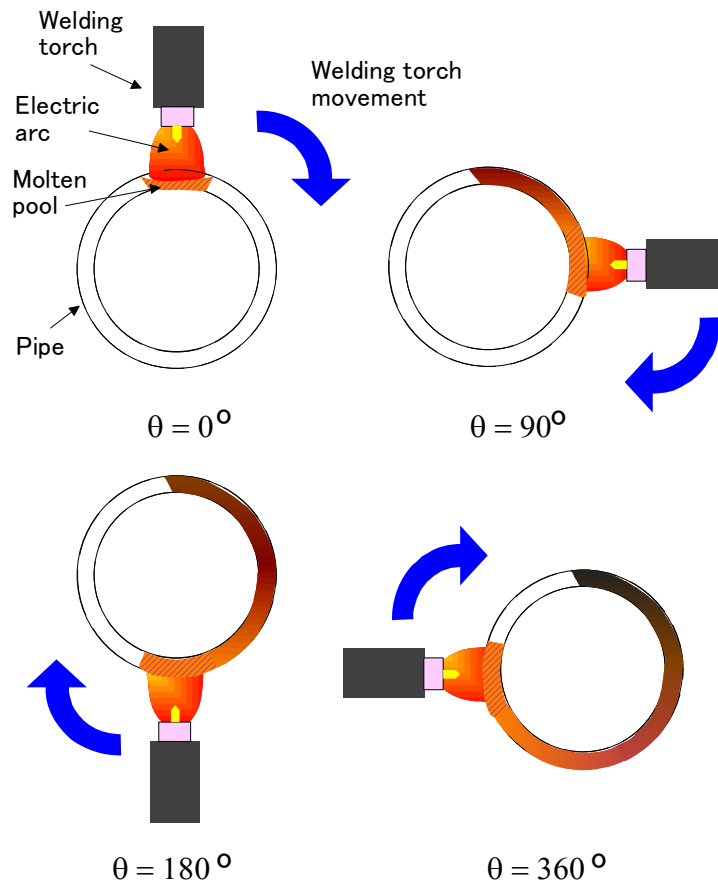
Weld bead profiles during pipe welding
